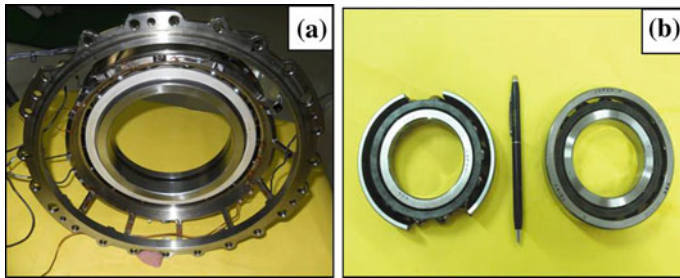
Photograph showing a failed squirrel cage bearing; b two support bearings
